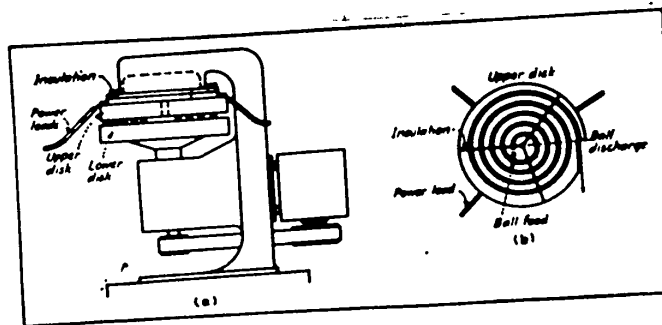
Russian Arc Machining Equipment for Lapping Balls for Ball Bearings. The upper wheel is divided into three mutually insulated segments, each of which is connected to the secondary of a three-phase transformer. The lower wheel rotates at a speed of 500 - 600 rpm. The balls are fed in the center of the upper wheel and move toward the periphery where they drop down.
